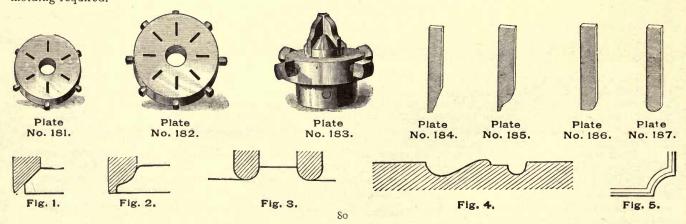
represents the regular countersinking cutter-head furnished with the Machine. This head receives cutters of 3/4 inch by 1/4 inch, or 3/4 inch by 3/16 inch steel, held in place by set-screws; the thrust of the cut being received on the washer-plate behind.
